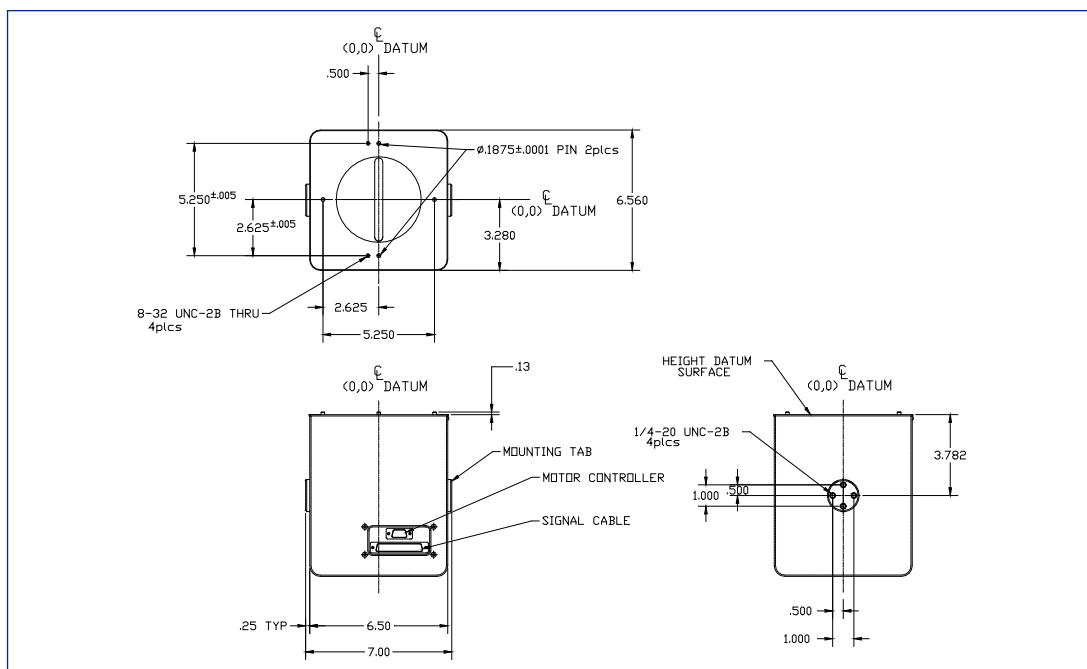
Detailed Mechanical Drawing showing the Dimensions of the LD 8900/LD 8900R Scan Unit
